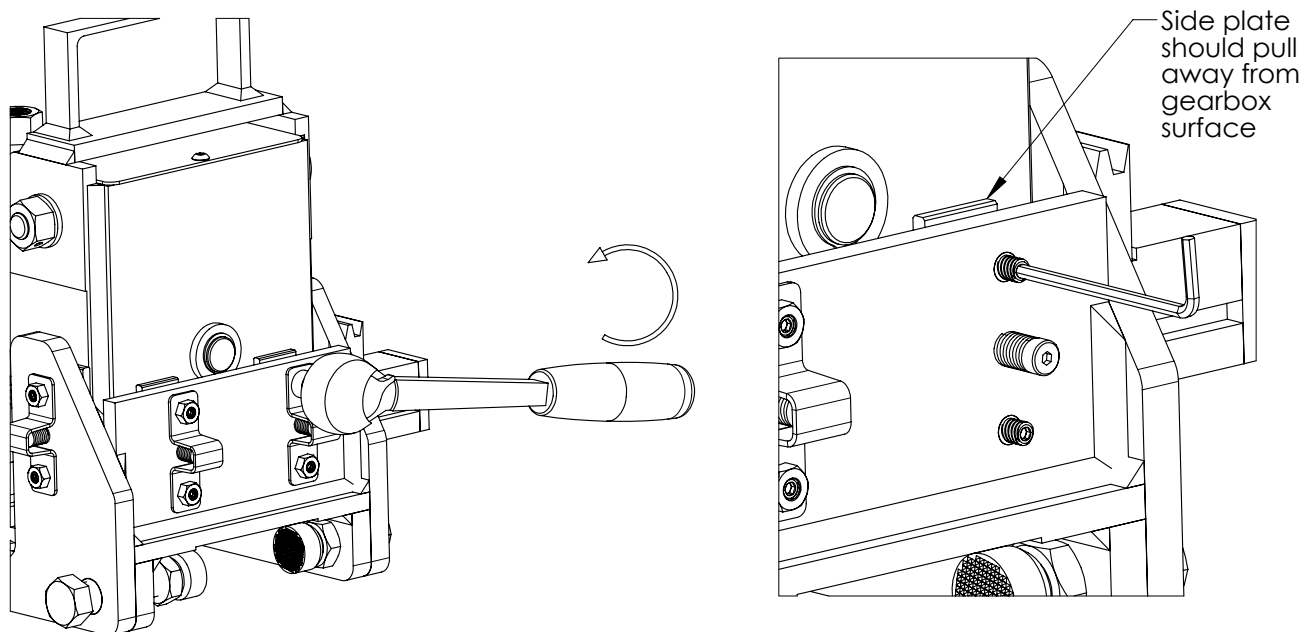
and 7: Removal of lock nuts and loosening of setscrews
